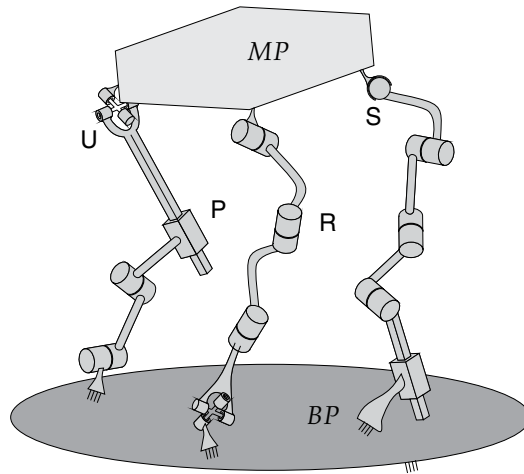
Schematic drawing of a PKM: P prismatic joint, R revolute joint, S spherical joint, U universal joint
